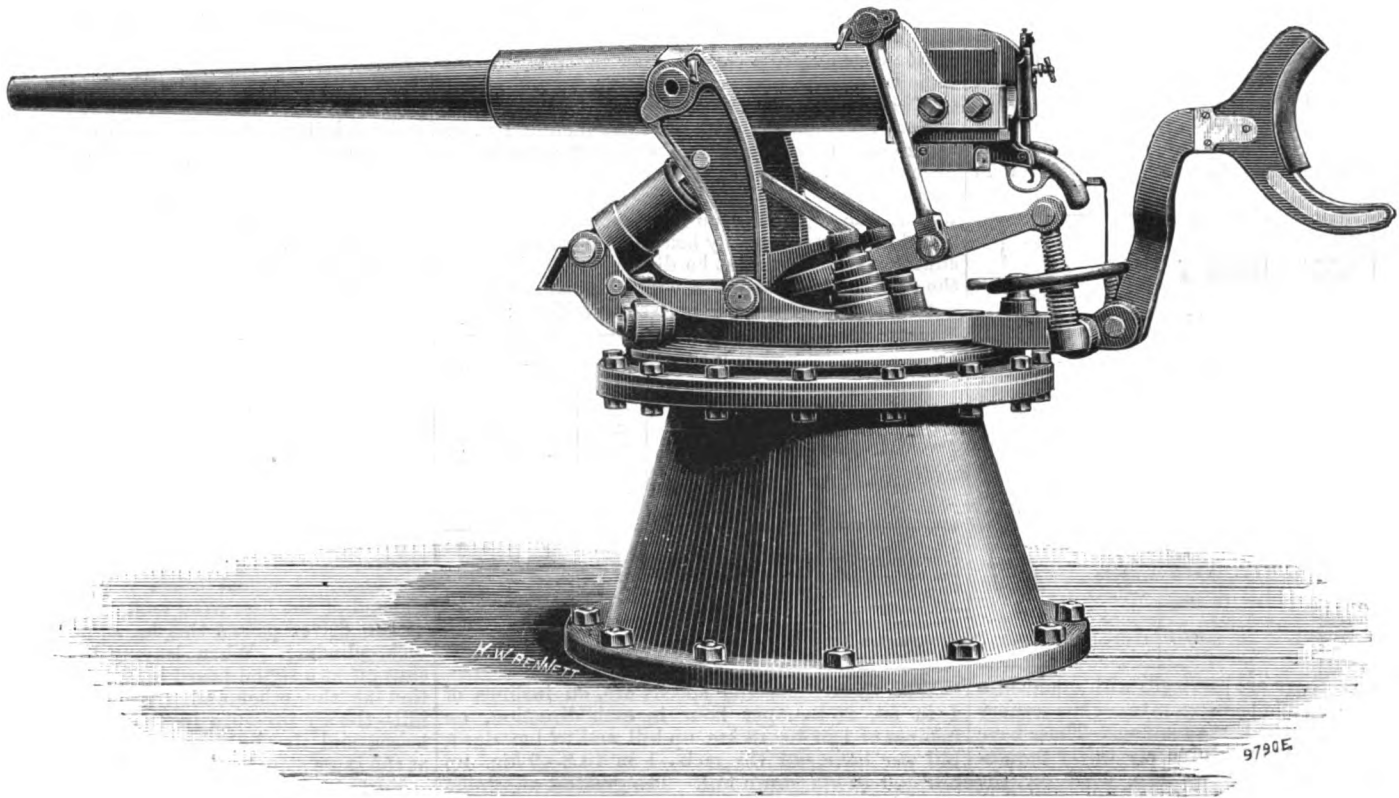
3-POUNDER GUN ON RECOIL MOUNT.
